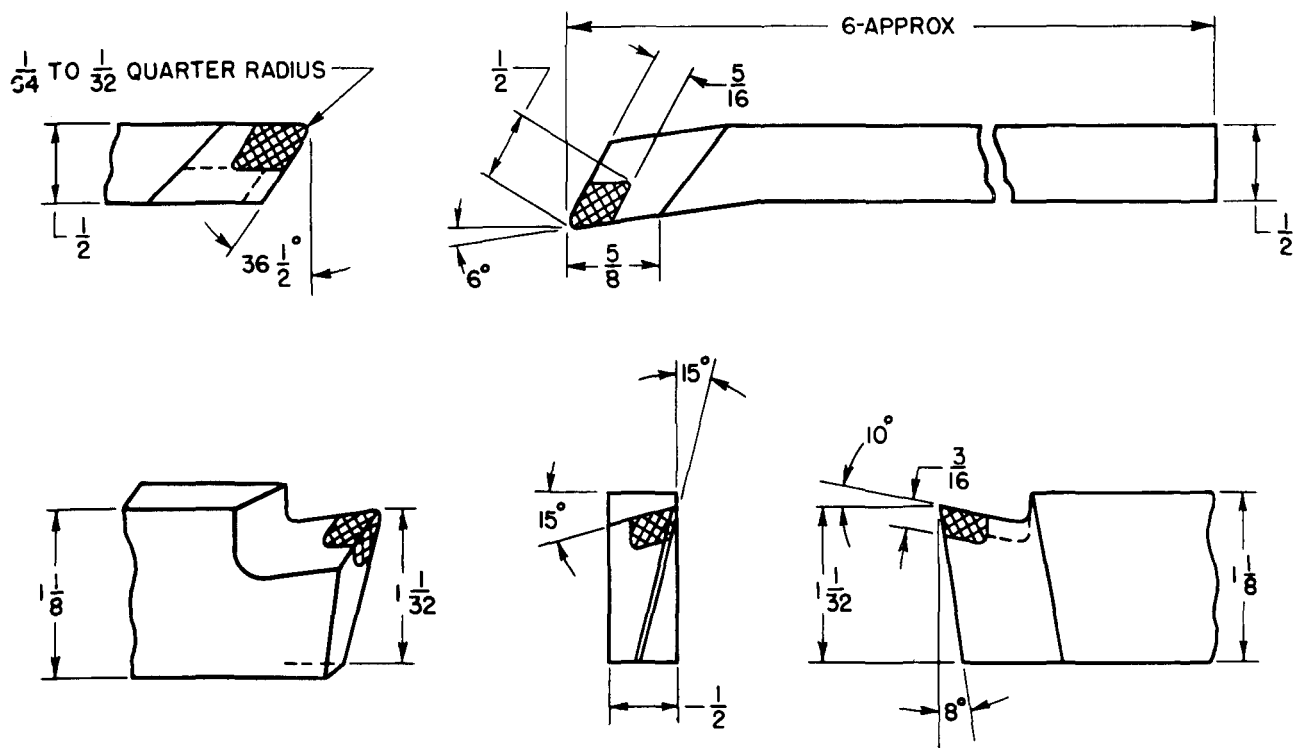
Fabrication of Carboloy-tipped Cutting Tool.
